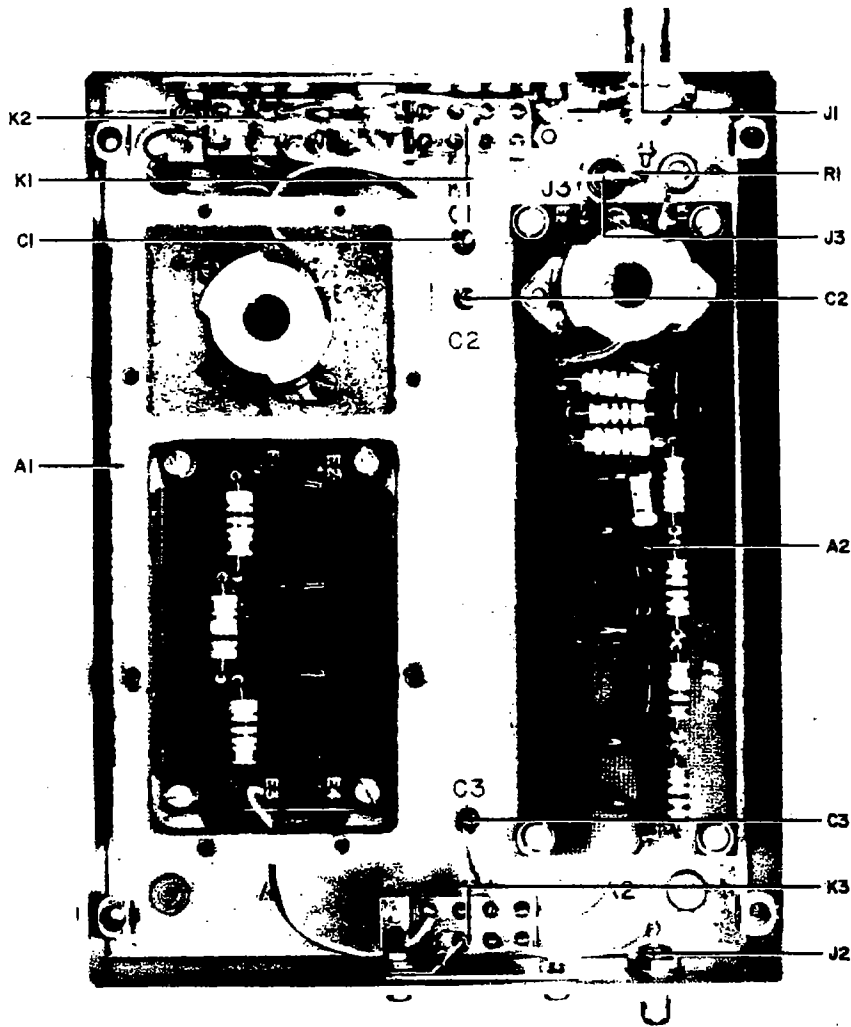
Type 79531 Input Filter Assembly (A19), Component Locations
